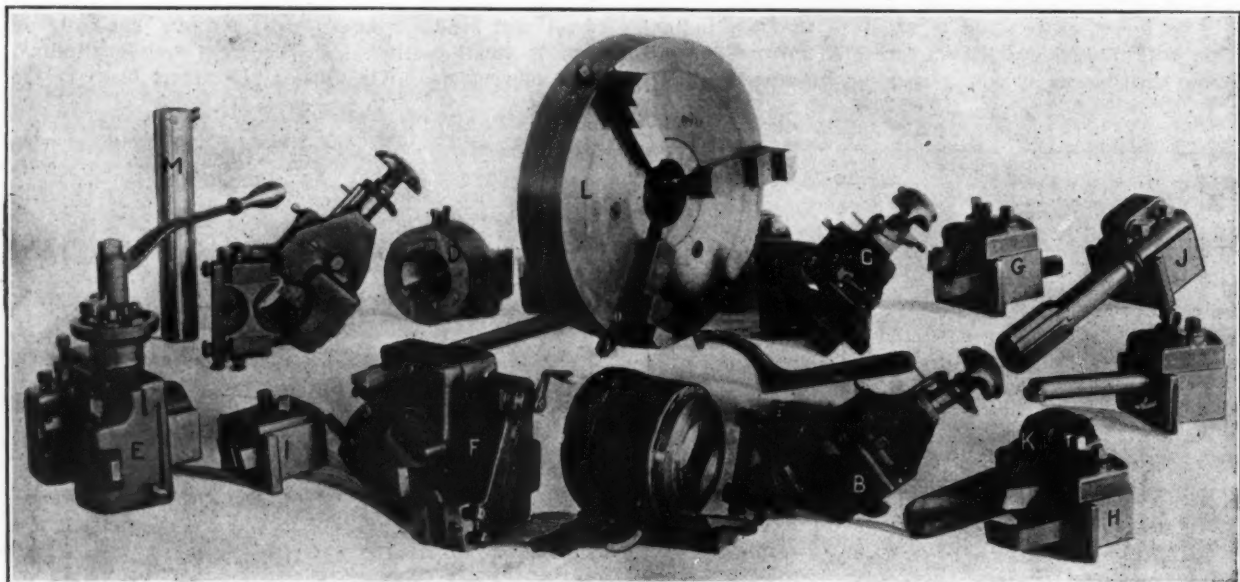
Some of the Tools and Attachments Used on the New Pratt & Whitney Turret Lathe.
